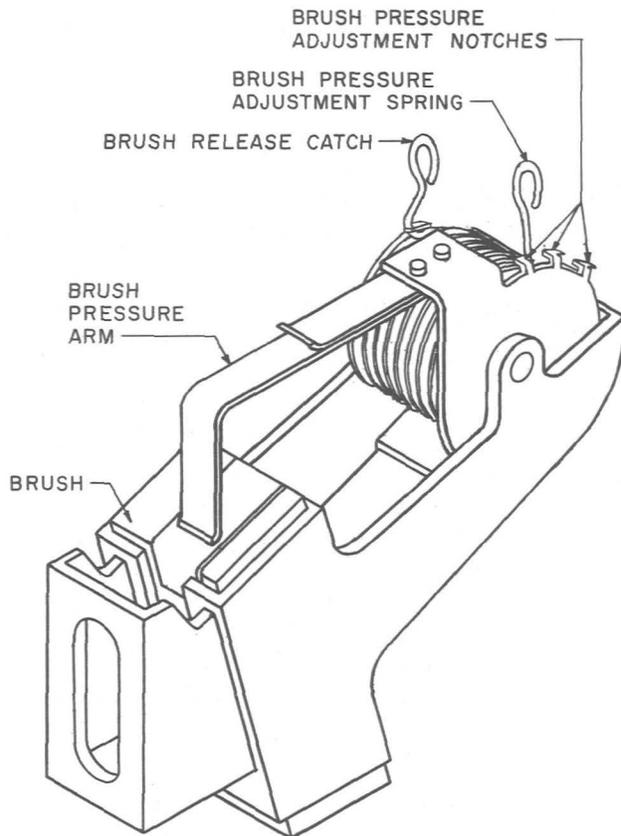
Fort Wayne-Type Brush Holder (used on earlier KS-5123-05 machines)
